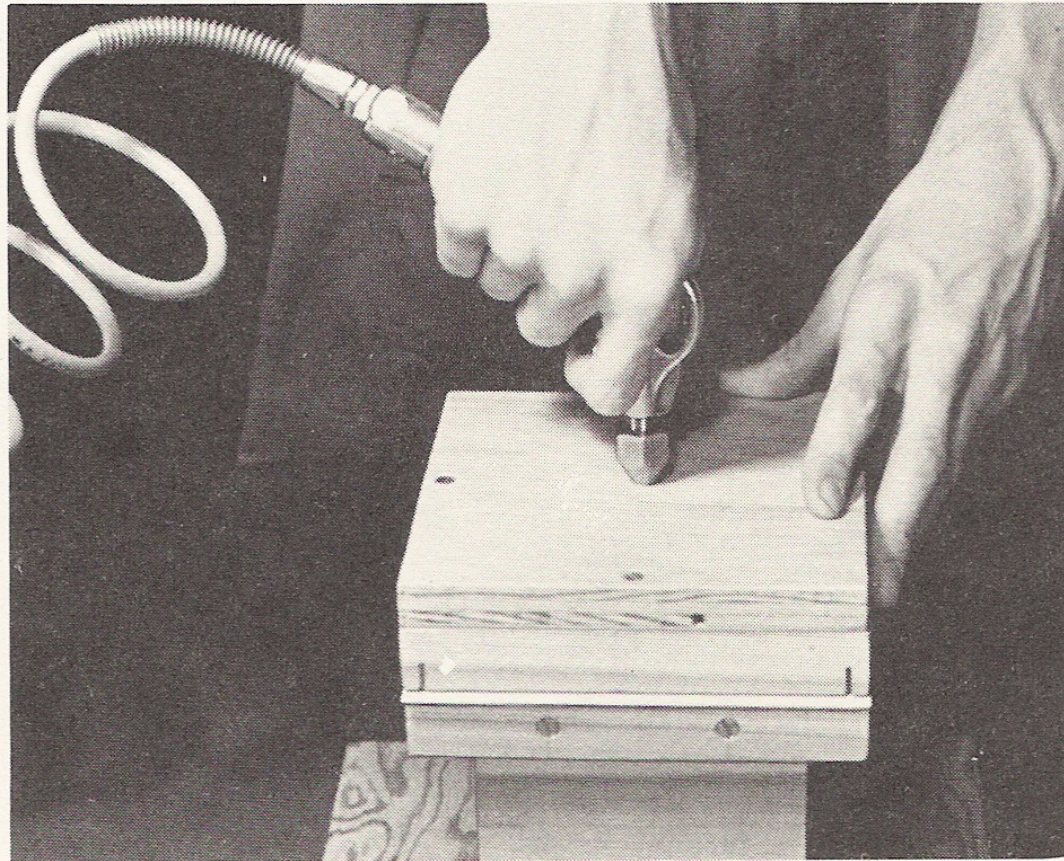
A blast of compressed air forces the soft sheet against the walls of the mold cavity.
